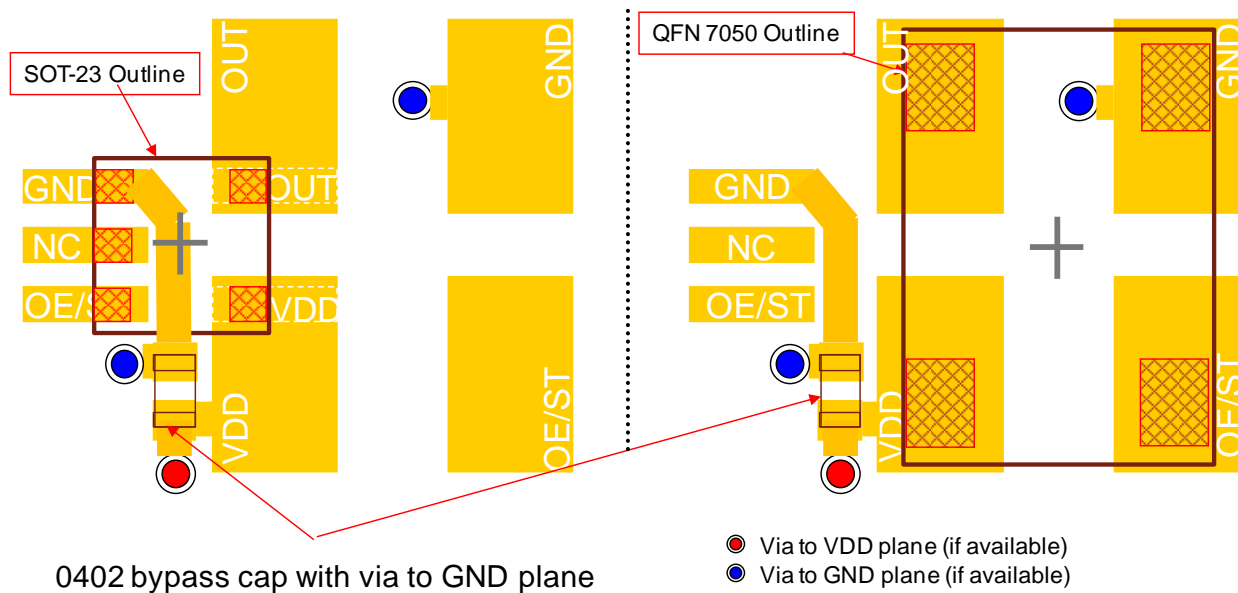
QFN 7050 and SOT23-5 co-planar design layout example showing placement of both QFN 7050 and SOT23-5 devices
